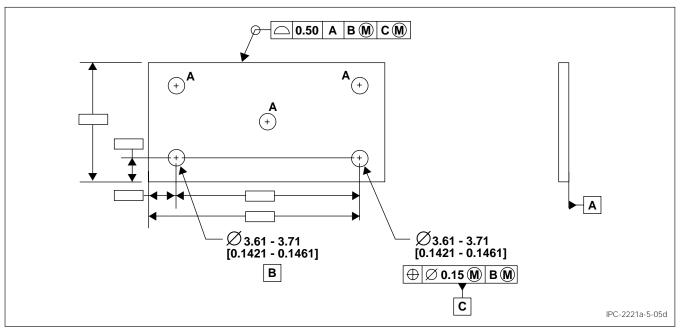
D Example of Printed Board Profile Location and Tolerance, mm [in]
